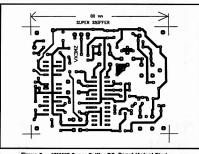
VK3MZ Super Sniffer PC Board (Actual Size).
